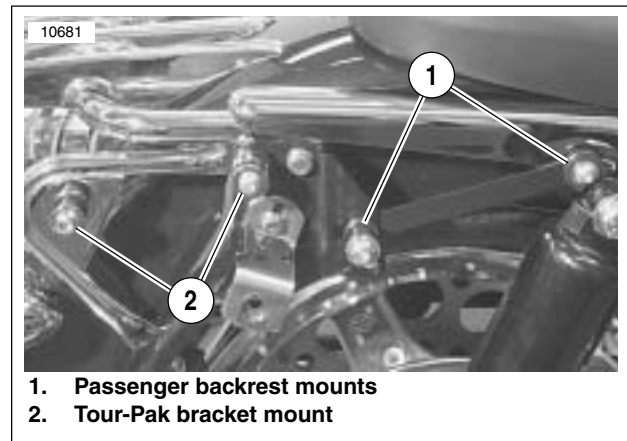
Passenger Backrest and Tour-Pak Docking Locations
